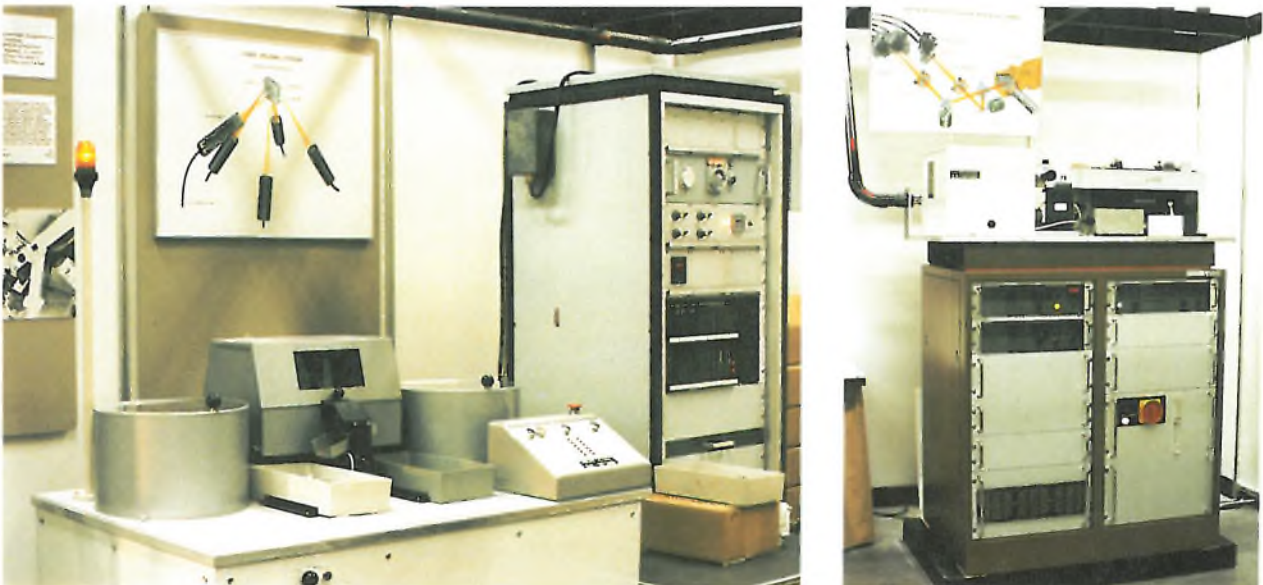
Industrial version of a laser spot-welder. In the right-hand photograph there is a large cabinet for supply and cooling of the laser, which is on top of the cabinet. To the left of the laser there is a large white 'box' in which the beam is split and focused on to the optical fibres, which continue through the black tube on the left in the photograph. In the left-hand photograph the cabinet on the right contains the control electronics for the system. The welding takes place inside the approximately rectangular light-tight shield at the centre of the table. The cylinders on either side of the shield contain the feed mechanism and the working stock of components to be welded.
